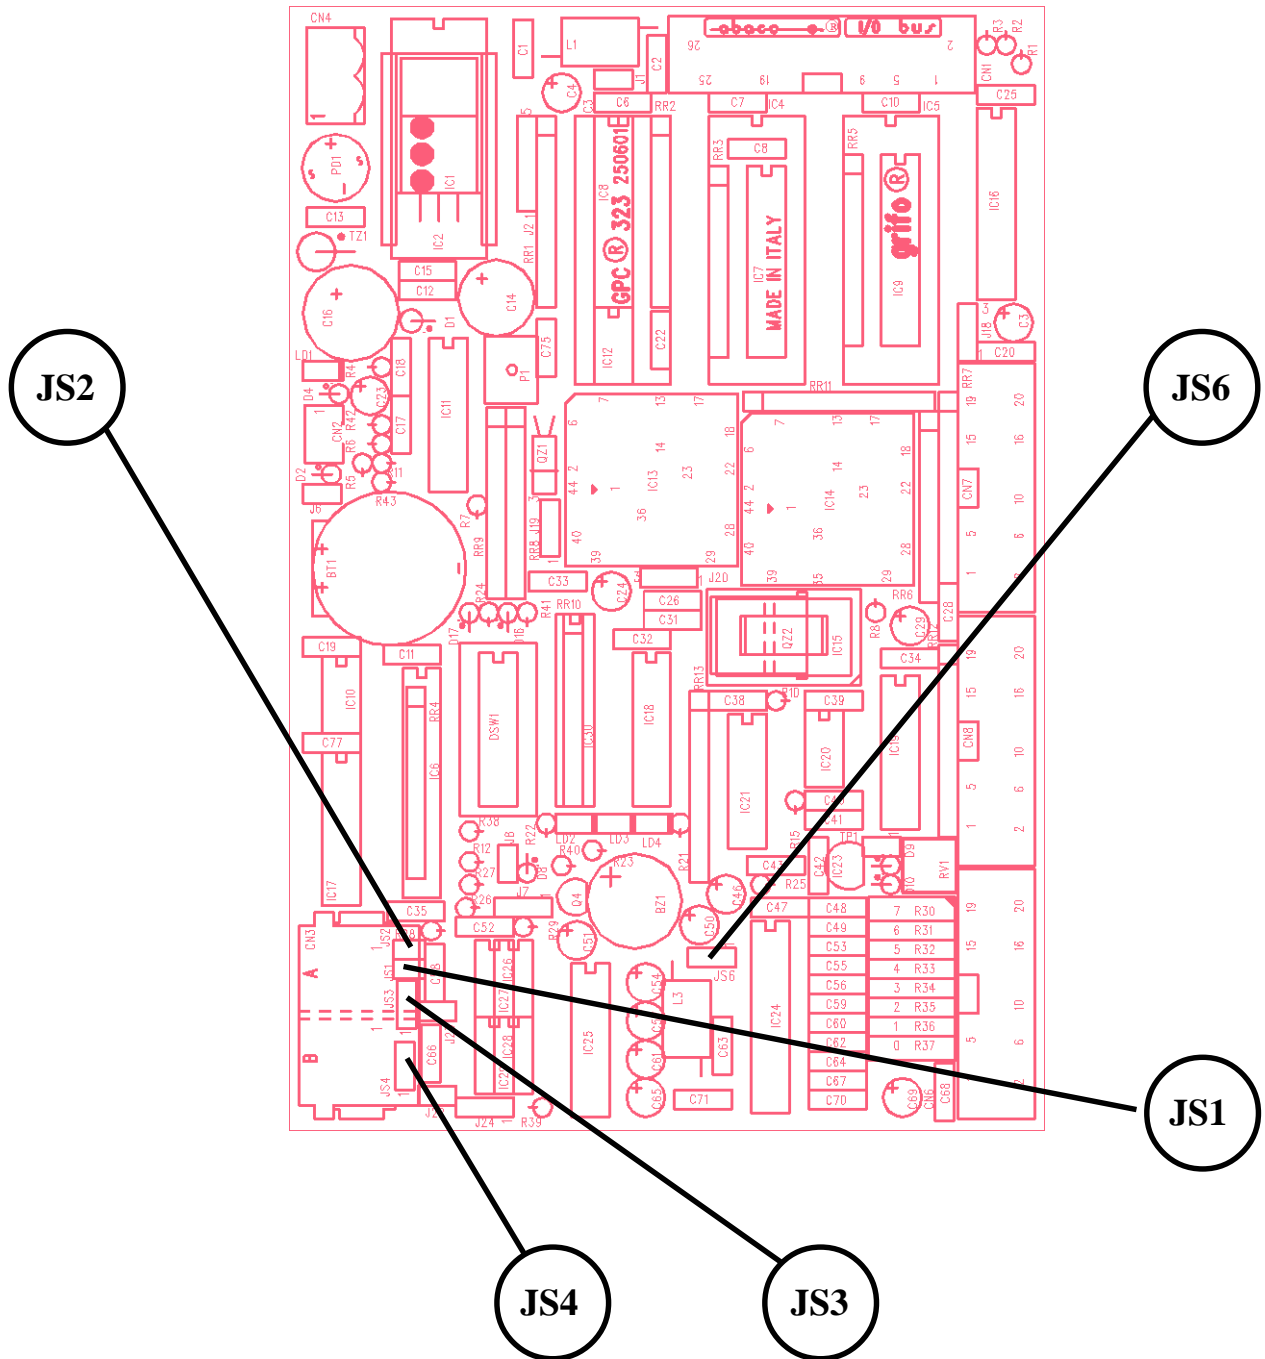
JUMPERS LOCATION ON SOLDER SIDE
